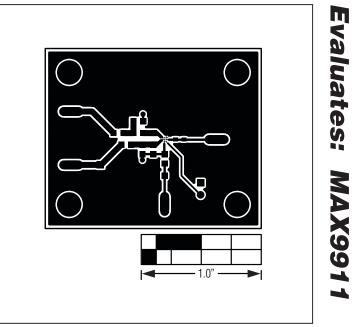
MAX9911 EV Kit PCB Layout—Component Side
